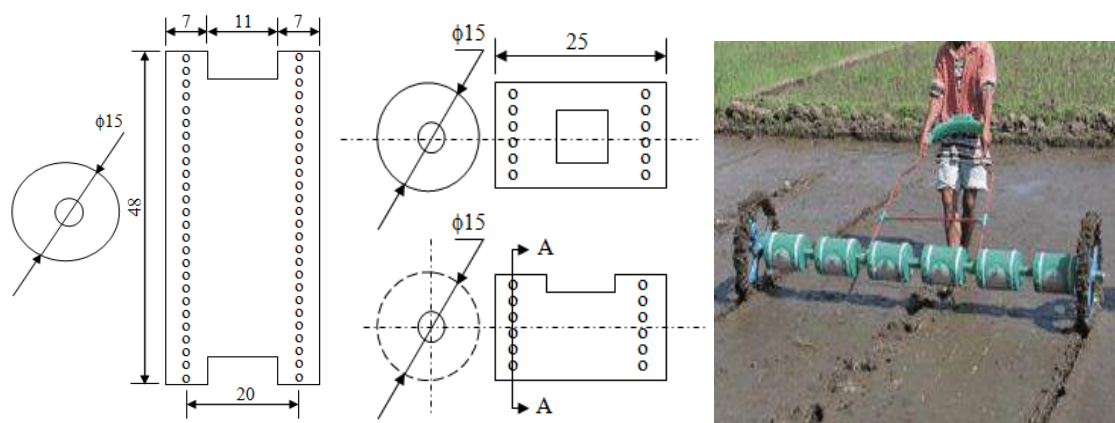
Shows a photo and a stretch out of the drum before modification
